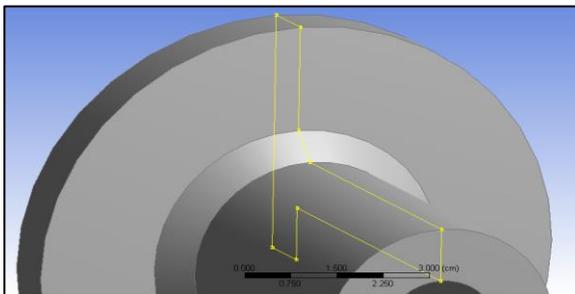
CAD modeling of weld joint using revolve tool
